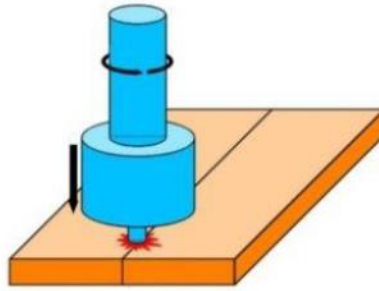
Stage 2 of the Friction Stir Welding Process – Plunge of Tool
